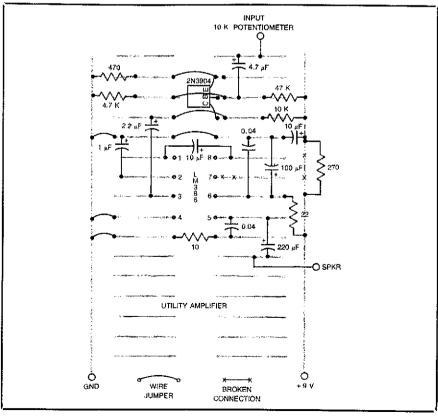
Example of a layout guide using the drawing of Fig 1 as a base. This layout can also be used to produce the final PC-board pattern.
